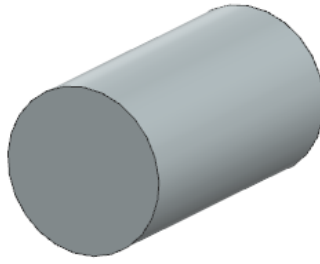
Upper cylinder used as a construction body for the optimised connecting rod.
